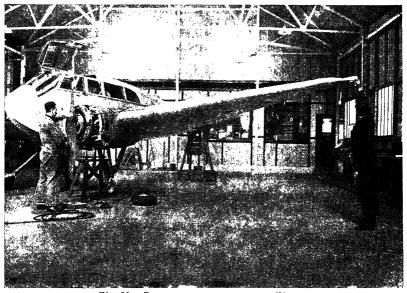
Check rigging dimensions (1). Checking the diagonal measurement from centre of engine shaft to wing tip.
